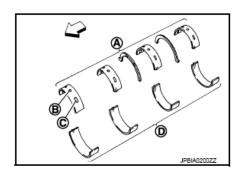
Identifying Main Bearing Installation Direction Courtesy of NISSAN NORTH AMERICA, INC.
